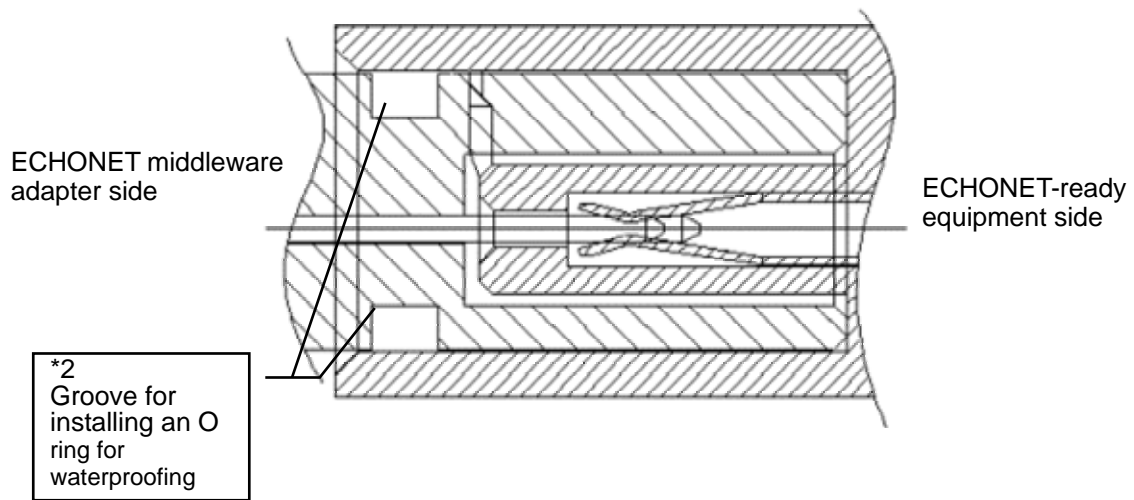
(d) MA9B Socket (ECHONET-ready equipment side)
